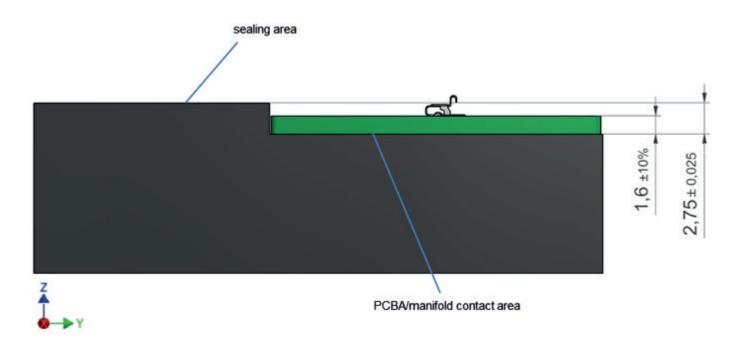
Positioning of a PCBA on a manifold (z-axis)
